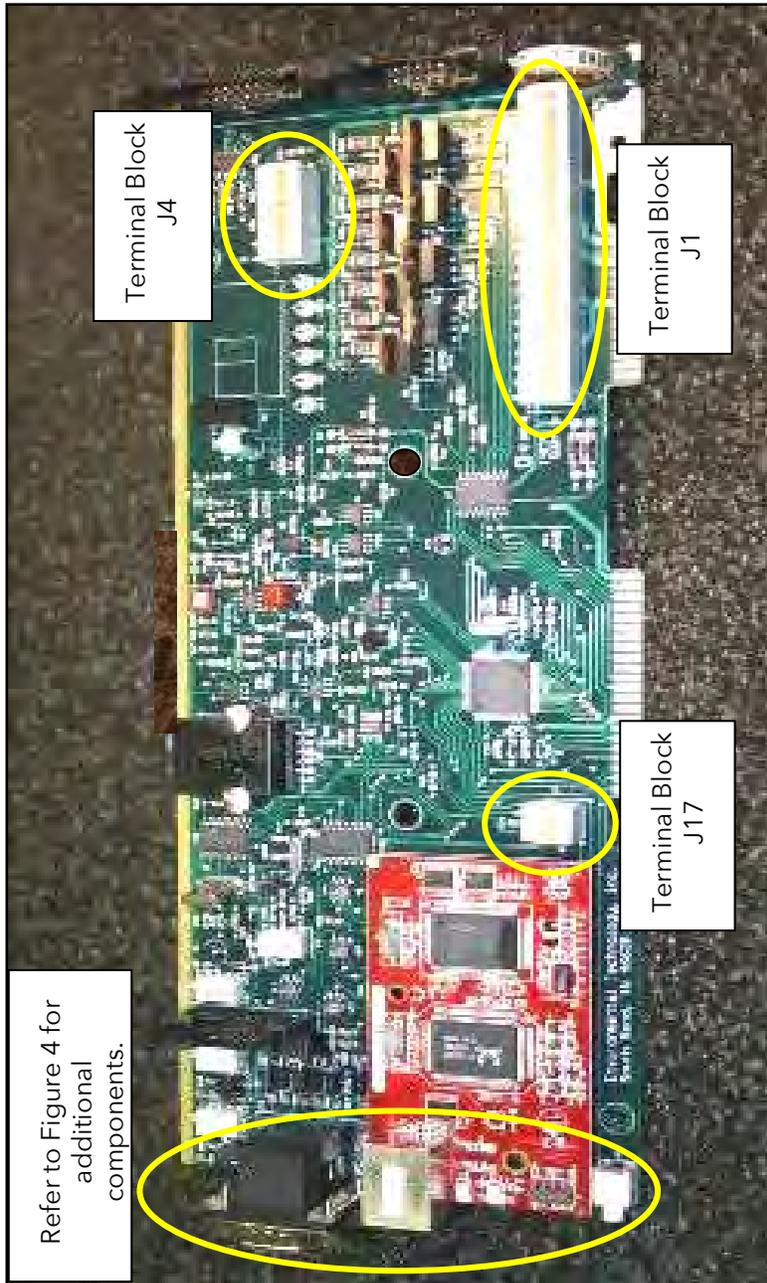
THE ADH NETCOM MAIN CIRCUIT BOARD ASSEMBLY.
